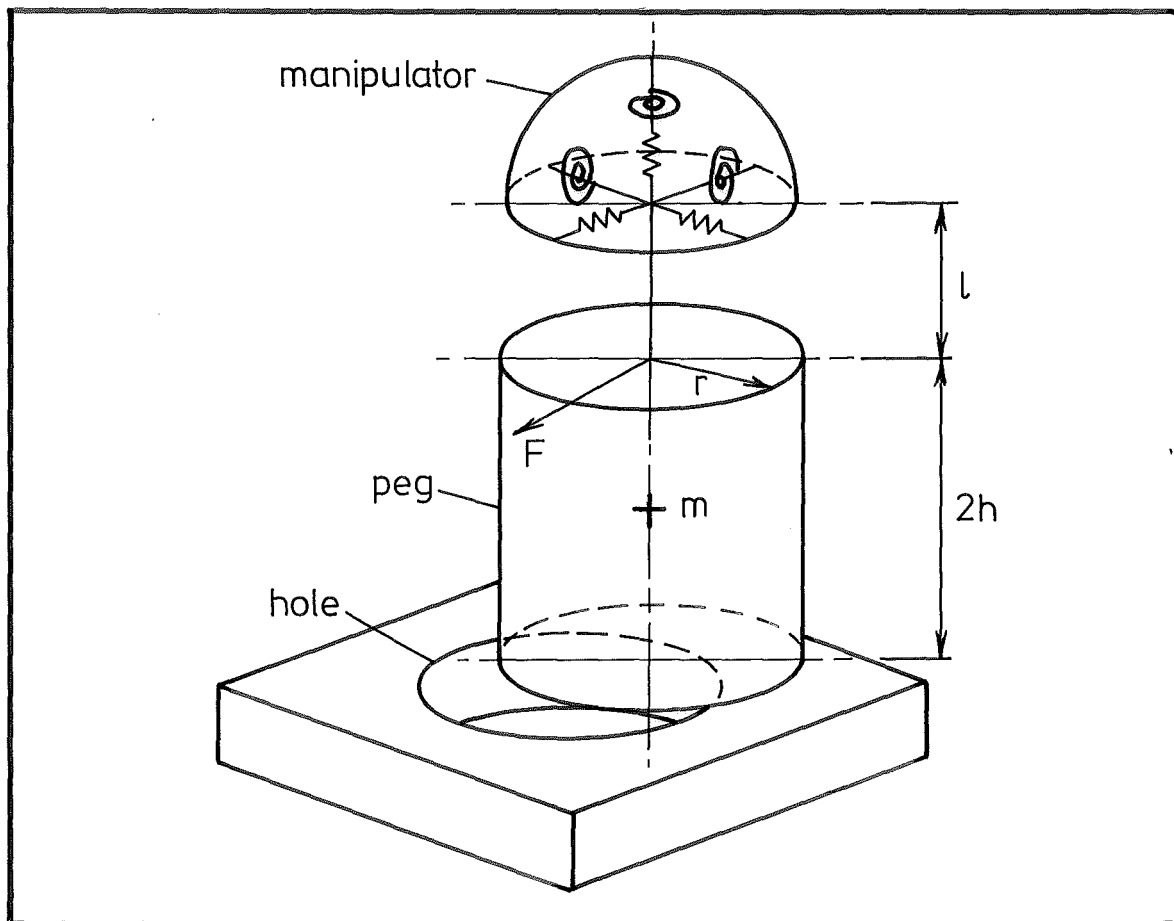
VIBRATORY ASSEMBLY DEVICE
